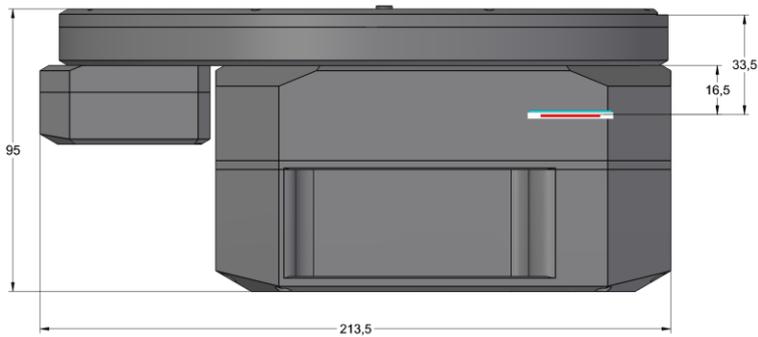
C3 camera head with Enhanced cooling and External filter wheel side view dimensions
